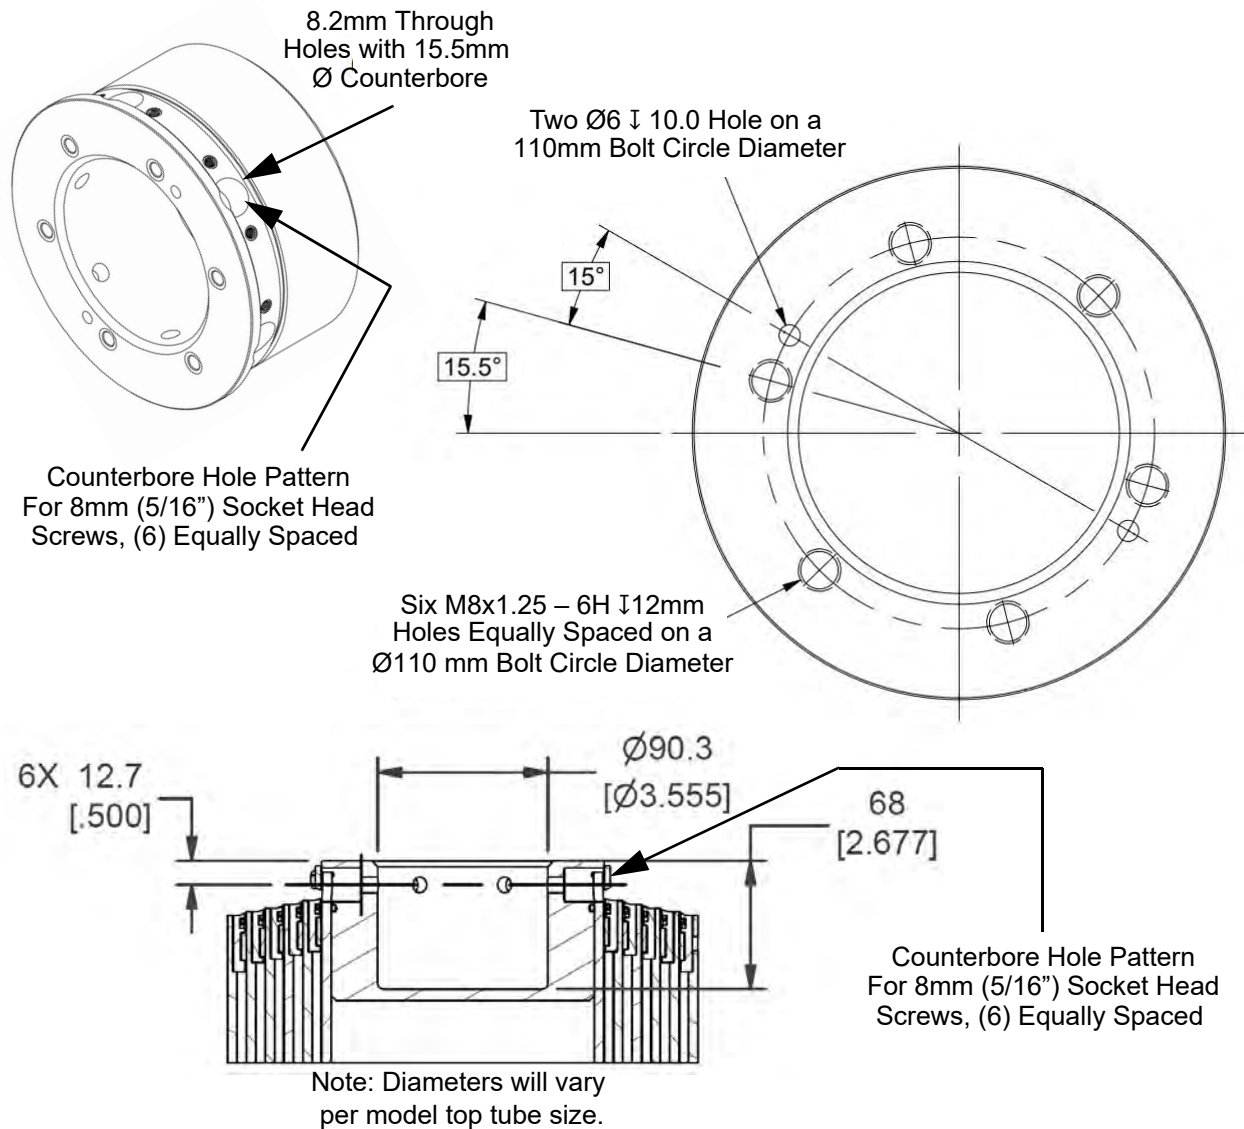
Top Tube Ring (Top Tube Ring P/N: 5889202 Shown)
